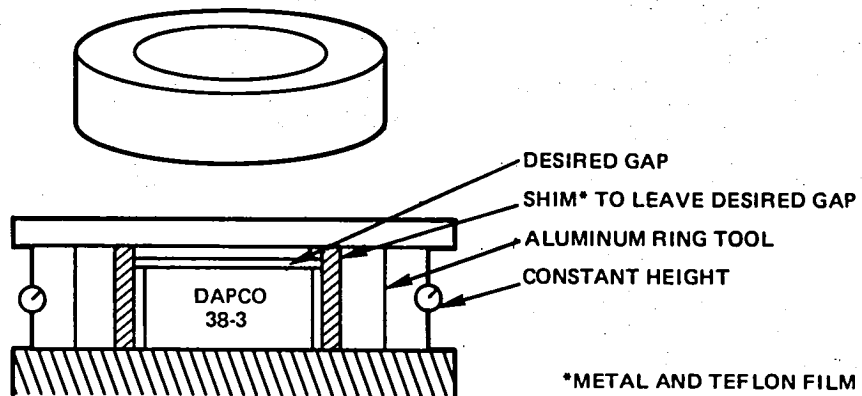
TRAPPED RUBBER TEST SETUP
